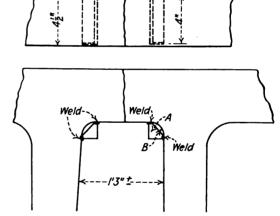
Blocks Are Welded in the Corners to Give the Shoe or Wedge an End Bearing
